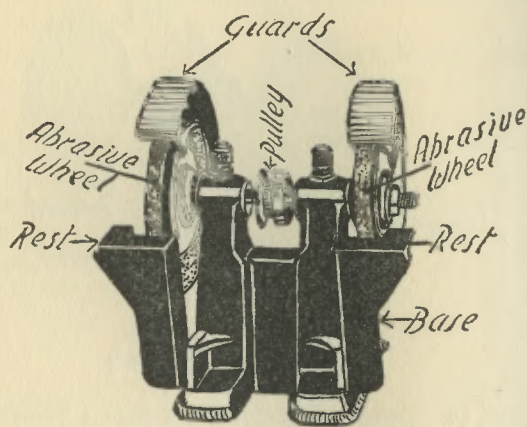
THE DRIVER 6-INCH BENCH GRINDER
